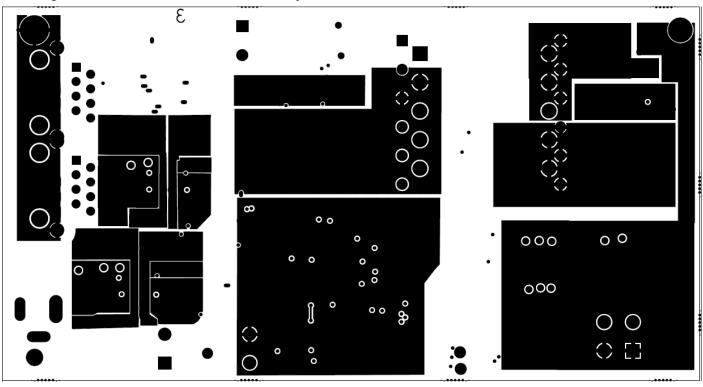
PD70201EVB60F12 EVB PCB Bottom Layer 4
